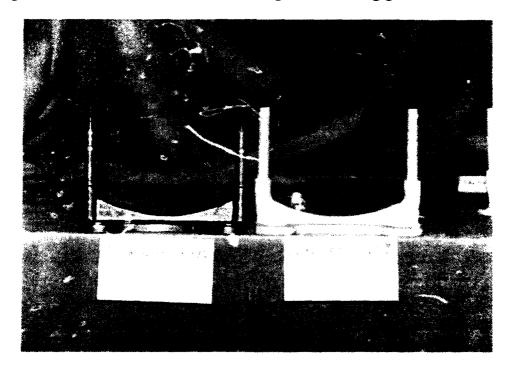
Close up view of Al-Br bracket and Isoplast molded bracket (note additional shoulder material and coarse threads on Isoplast bracket)
